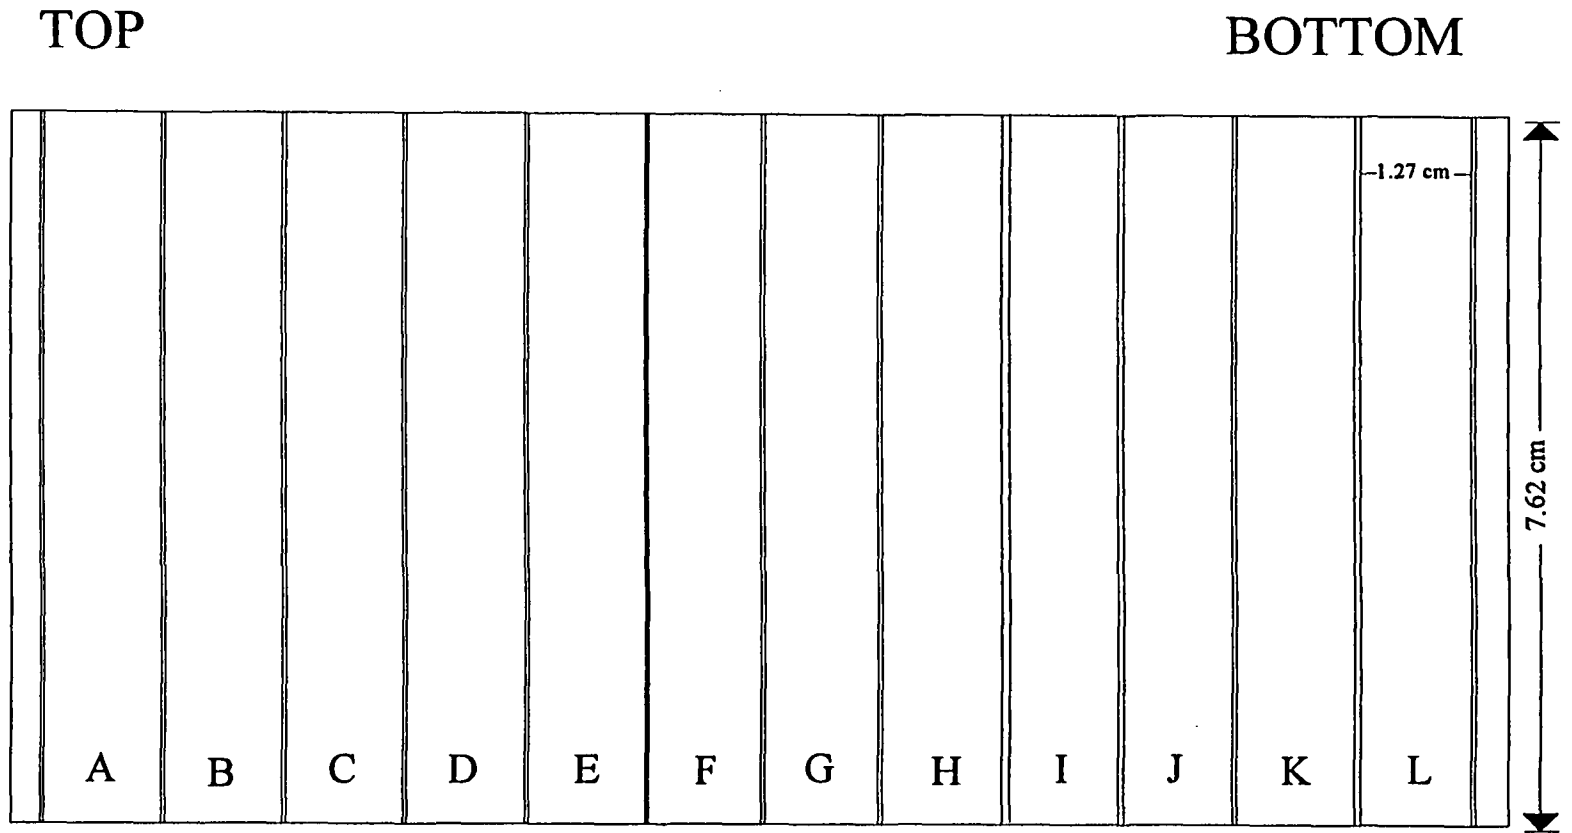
Machining specifications for additional long transverse tensile specimens.
